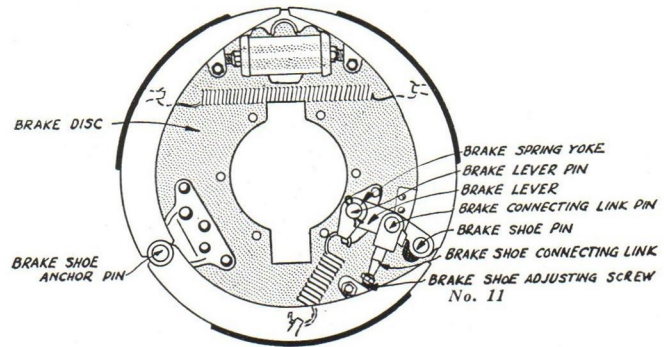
Flint Lockheed three shoe assembly with early type brake lever installed
